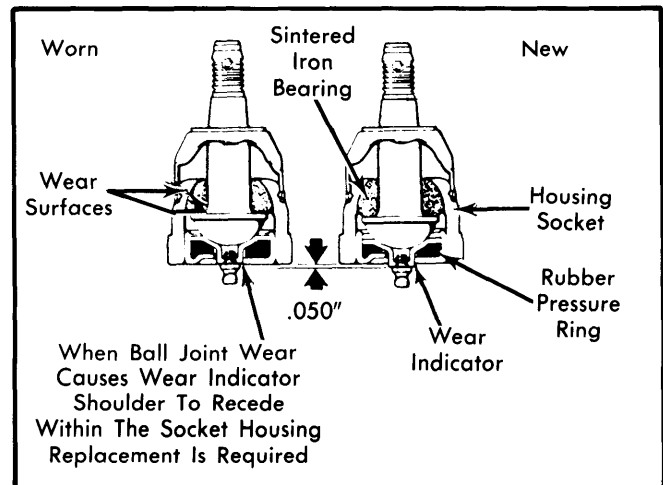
General Motors Lower Ball Joint Wear Indicator (Ford Fairmont & Zephyr Similar)
